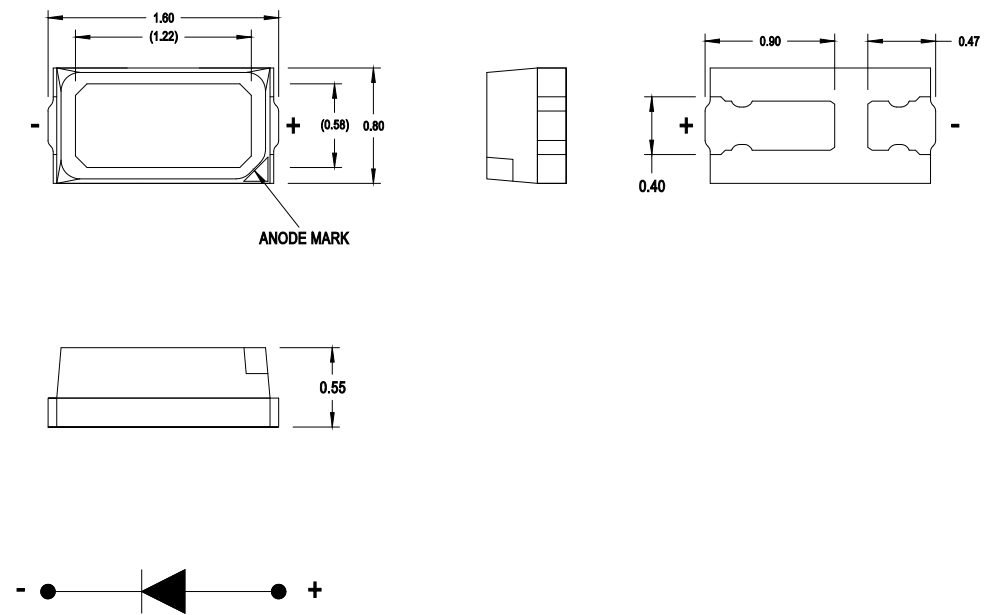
Package Drawing for Red, Amber, Blue, and PC Amber
